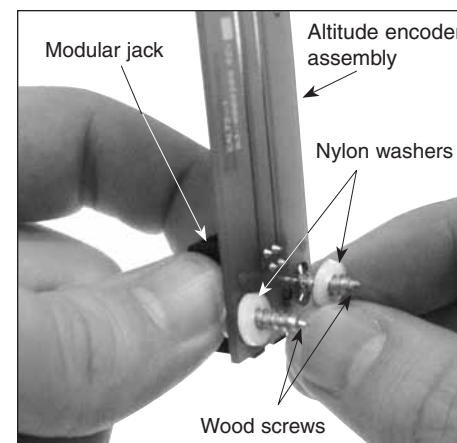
Place a nylon washer on the end of each screw after the screws are pushed through the altitude encoder assembly.
